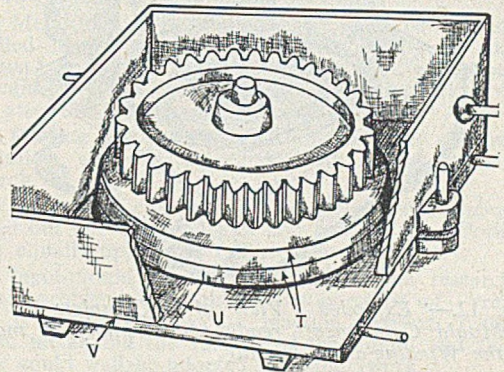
Re-assembly of the Pattern for Moulding, incorporating the Stripping Ring and its Print at (T).
